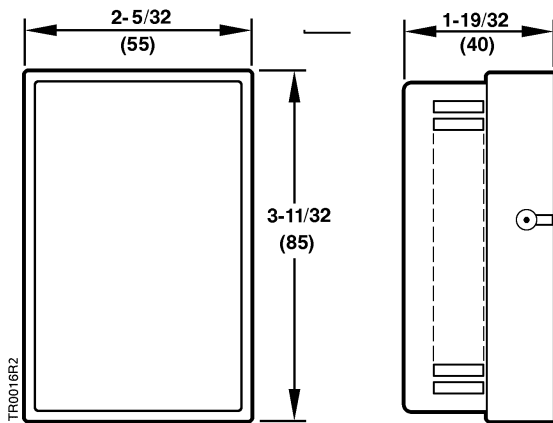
Dimensions of the Room Transmitter. Dimensions in Inches (Millimeters).
